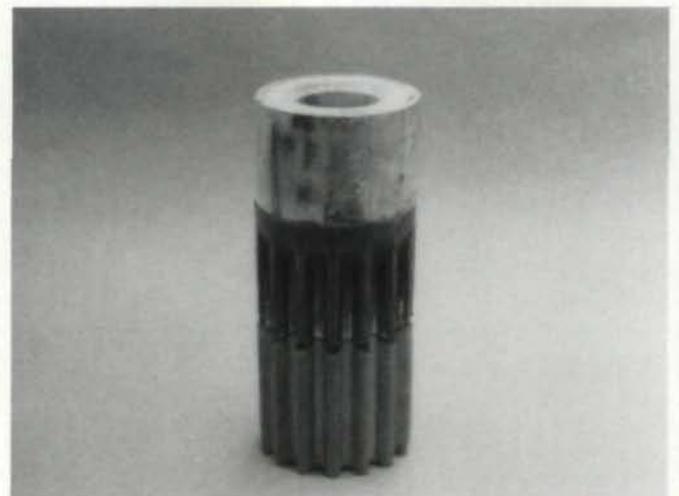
Sequence of Parts For Extruding Spur Gears. Billet is on Top, Partially Formed Gear is in the Middle, and Complete Extruded Gear is on the Bottom.
